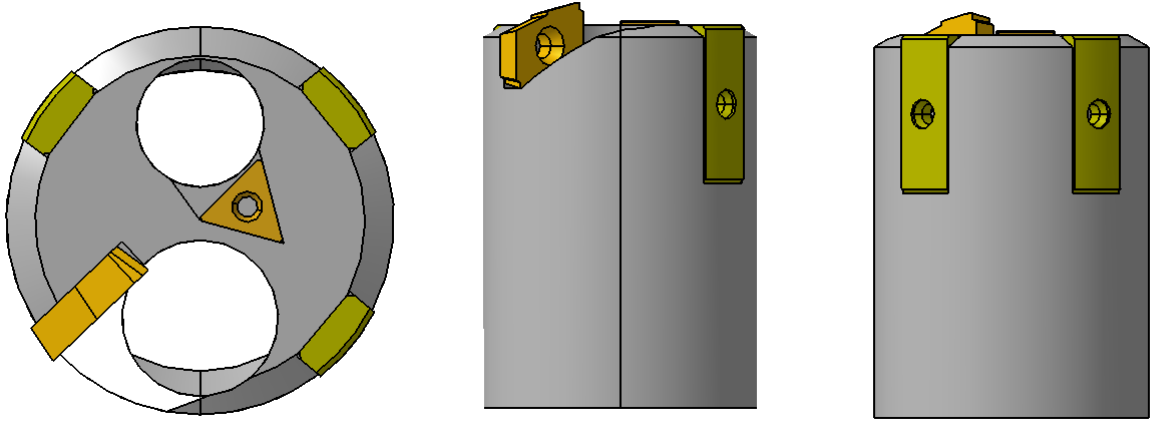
3D model of the BTA deep hole drilling tool.
